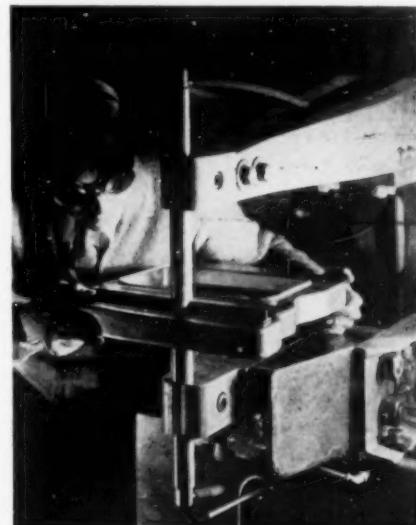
Close-up view showing a spot welding machine at work on an aluminum airplane tank part.
